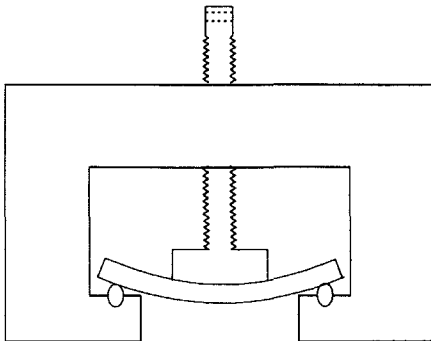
Crack testing result of 3 point bending type crack testing jig
